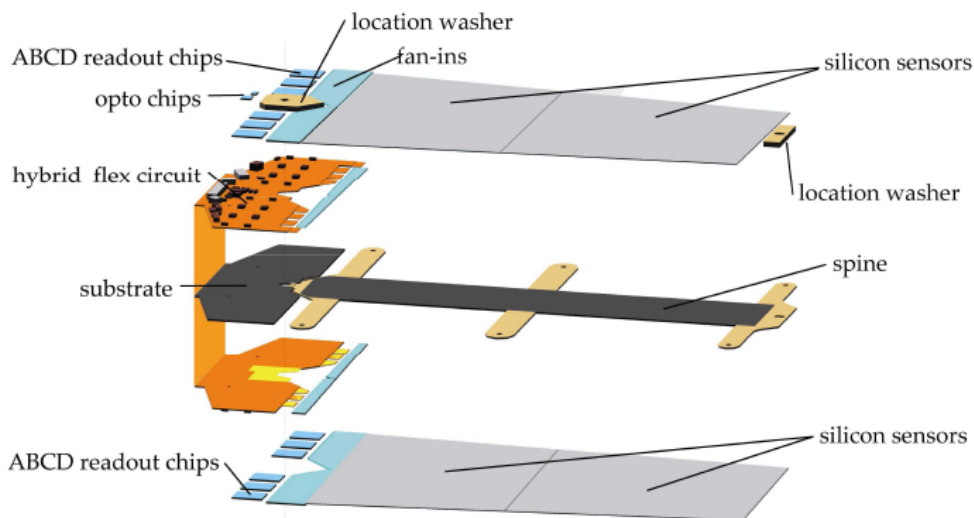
Exploded view of an SCT end-cap module showing the different components.
